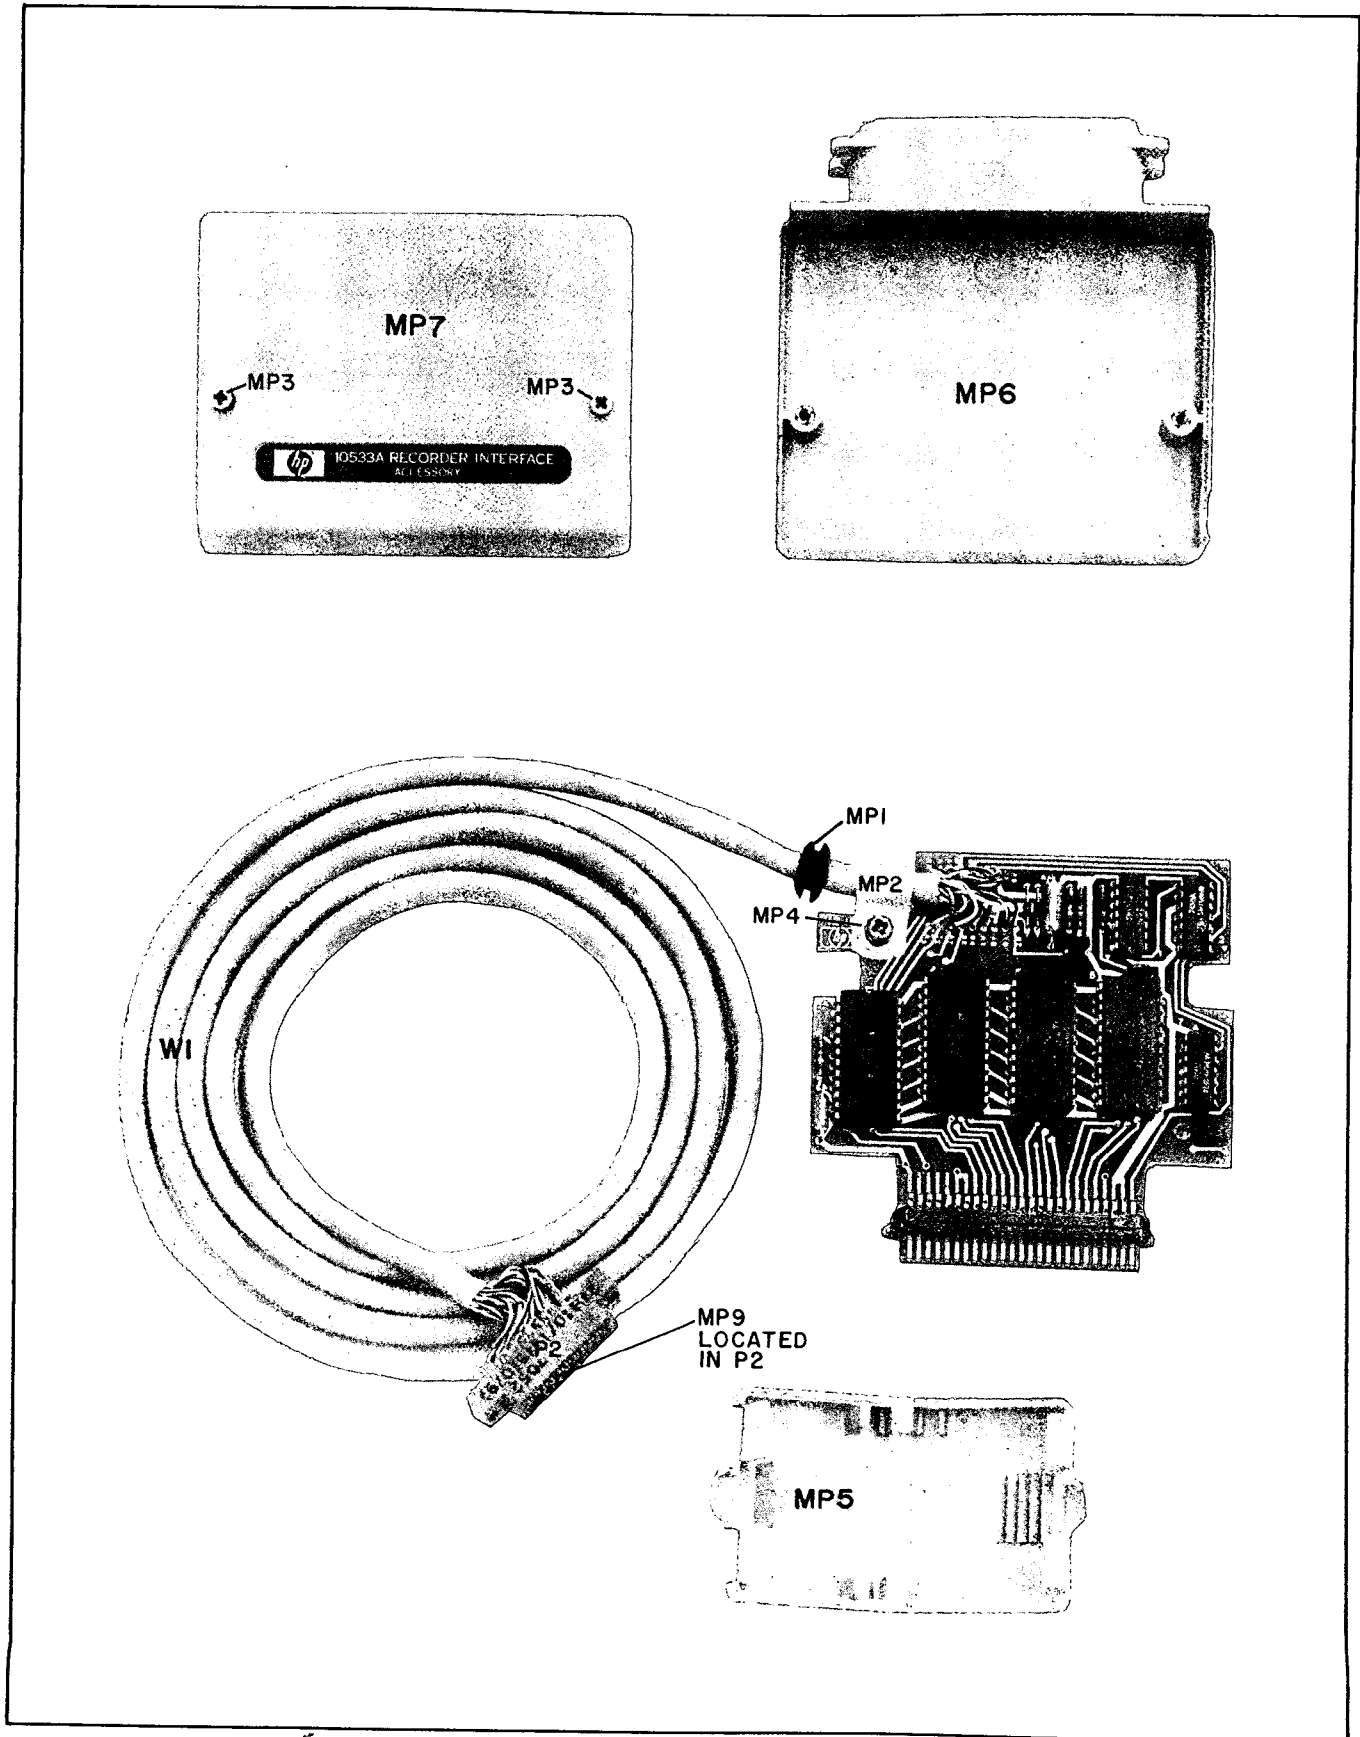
10533A Recorder Interface Mechanical Parts Location
